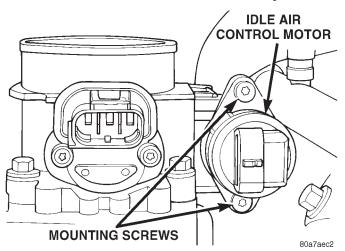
Mounting Bolts (Screws)—IACMotor—4.0L Engine
